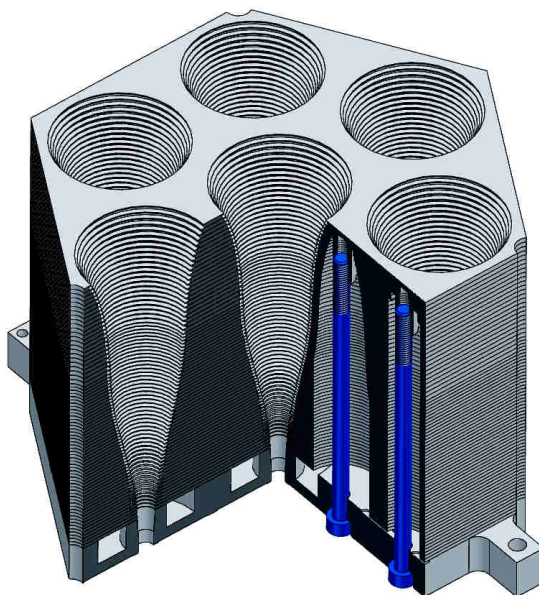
An assembled hexagonal module of seven Q-band feedhorns. The cross section shows how the long M6 screws are tightened to the bolts of the head plate, passing through the lightening cavities of the plates.
